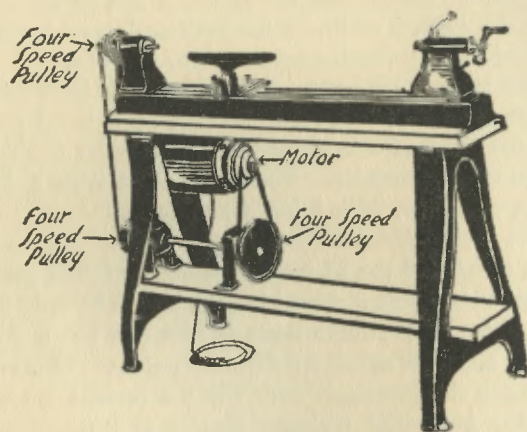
THE DELTA DOUBLE-DUTY LATHE
